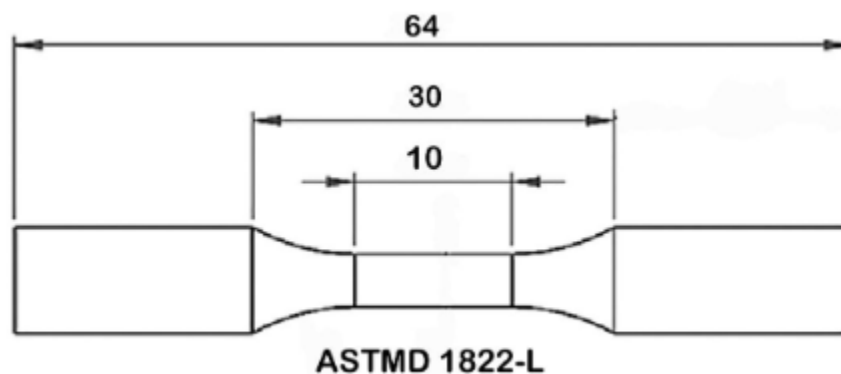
Detail measurement for tensile test sample (ASTMD 1822-L)
